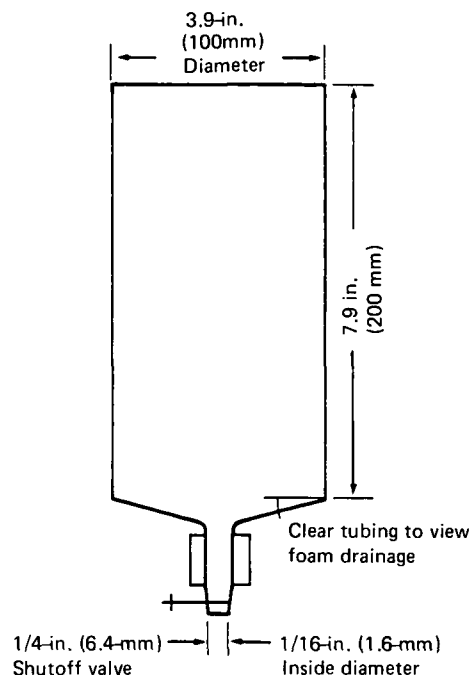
1600-ml Foam Sample Container
